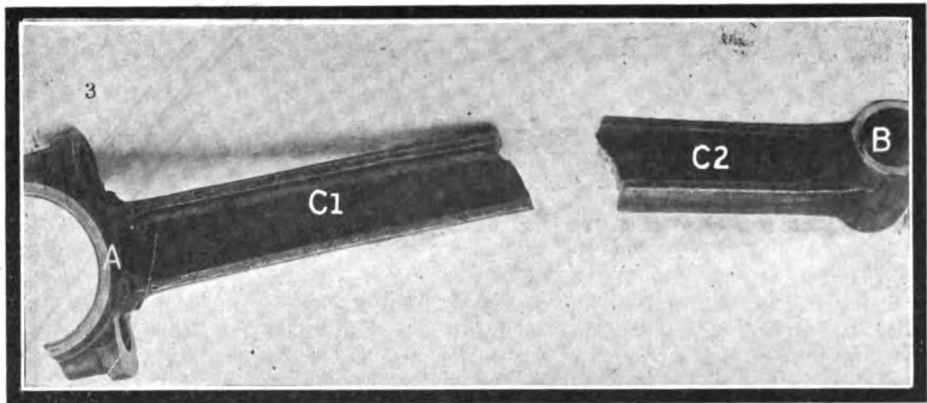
A broken connecting rod before being repaired; it will be seen that the break is clean and sharp
